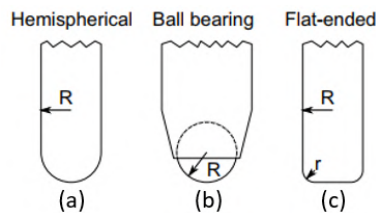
Main types of tools used in SPIF: (a) hemispherical tool, (b) rolling ball tool, and (c) flat-ended tool (McAnulty *et al.*, 2016).
